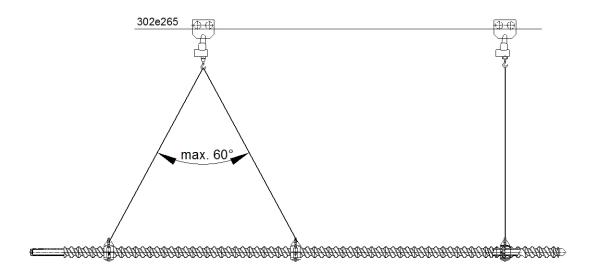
Transporting screw shafts from a length of 13 - 16 screw barrels
